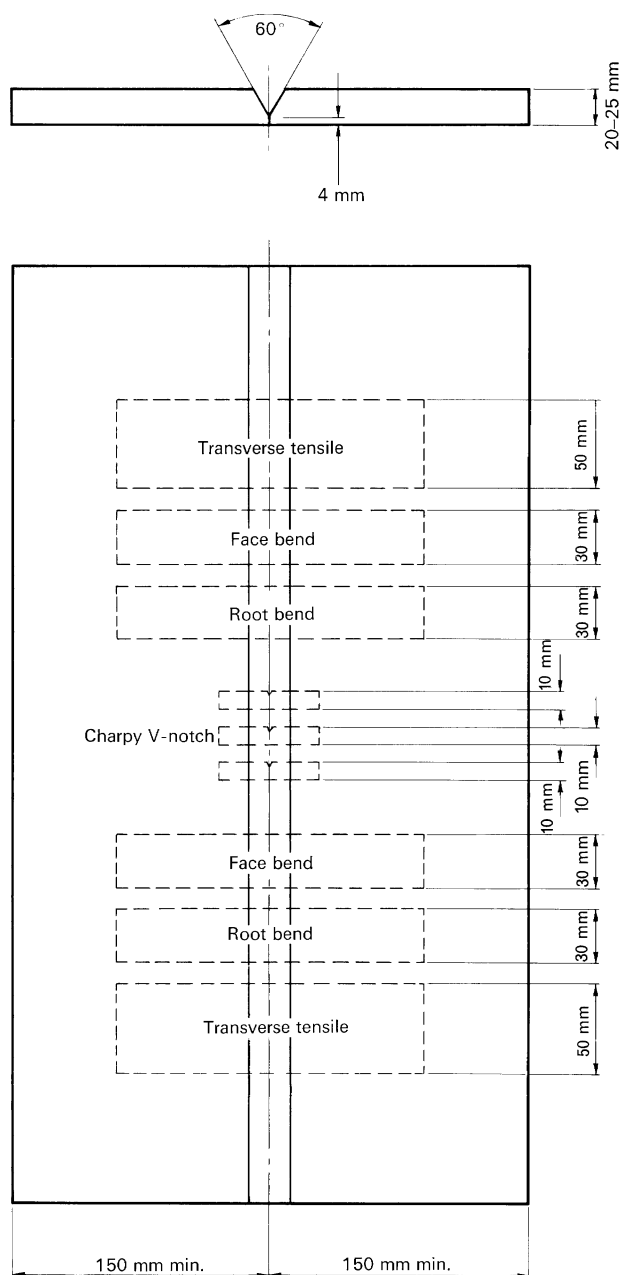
Butt weld test assembly (multi-run technique)
